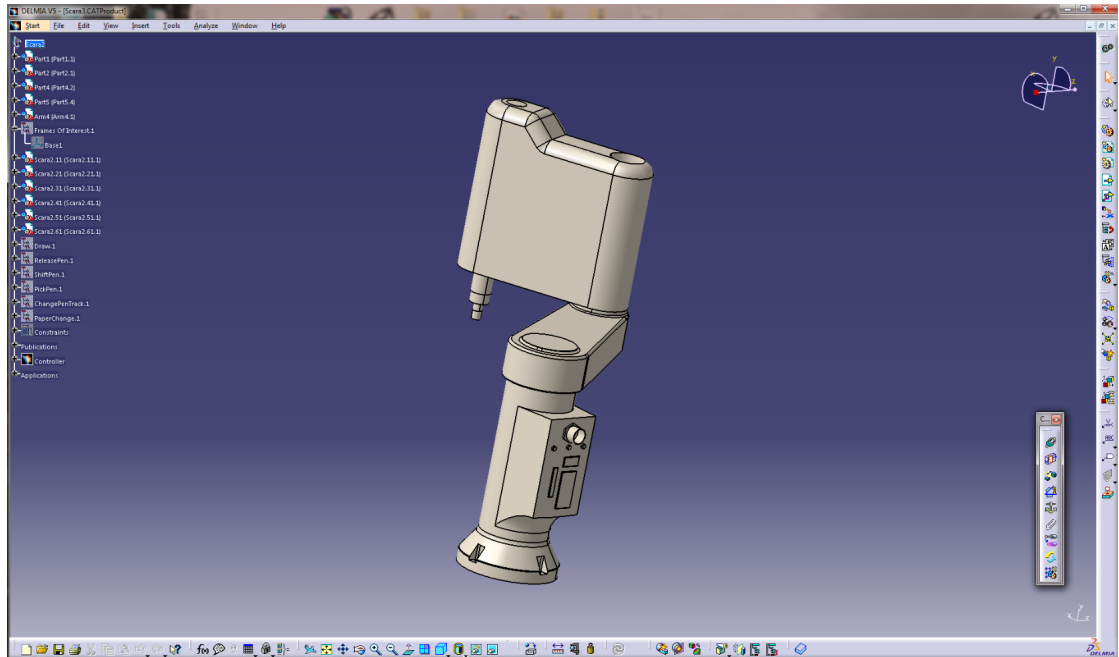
3D object assembled completed in DELMIA 3D CAD software [P12].
